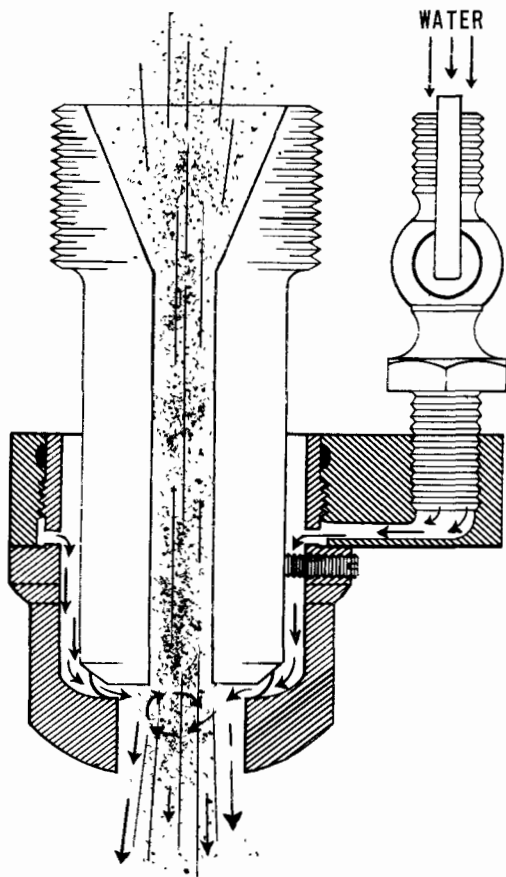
Adapter nozzle that converts dry sandblasting to wet sandblasting (Sanstorm Manufacturing Co., Fresno, Calif.).
